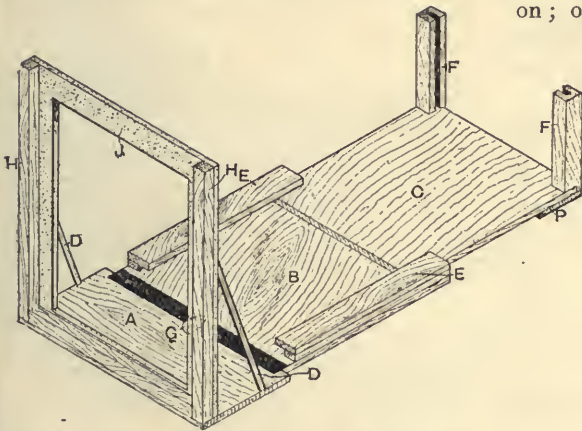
ENLARGING CAMERA WITH BELLOWS AND FRONT REMOVED.
